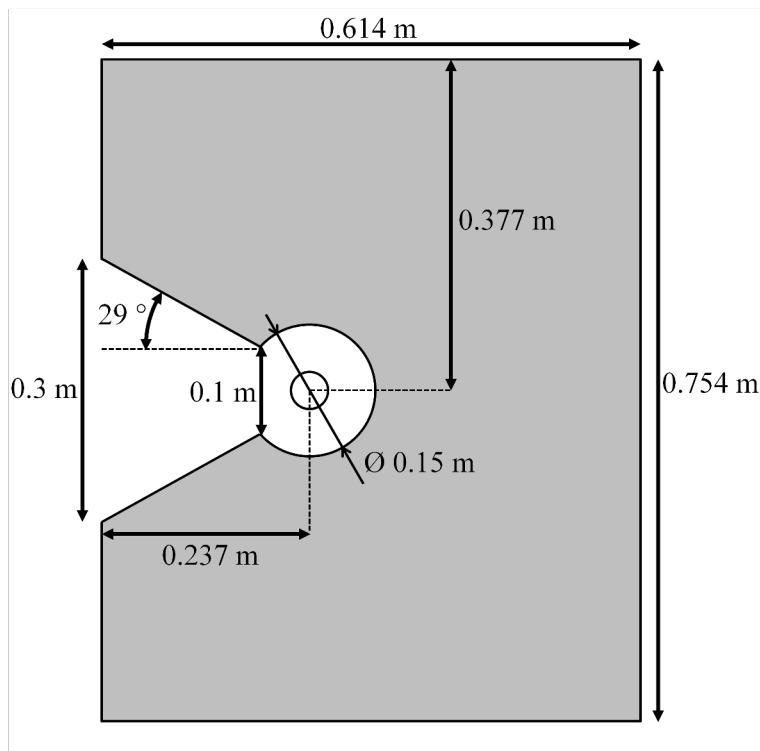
Horizontal cross sectional view of the receiver cavity.
